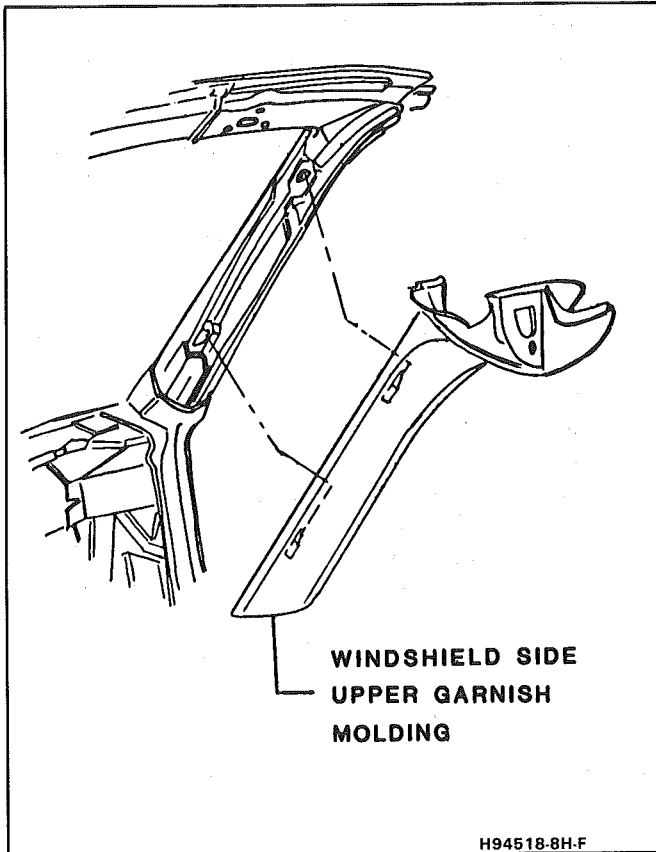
Interior Garnish Moldings (Twin Lift-off Panel Equipped Cars)
